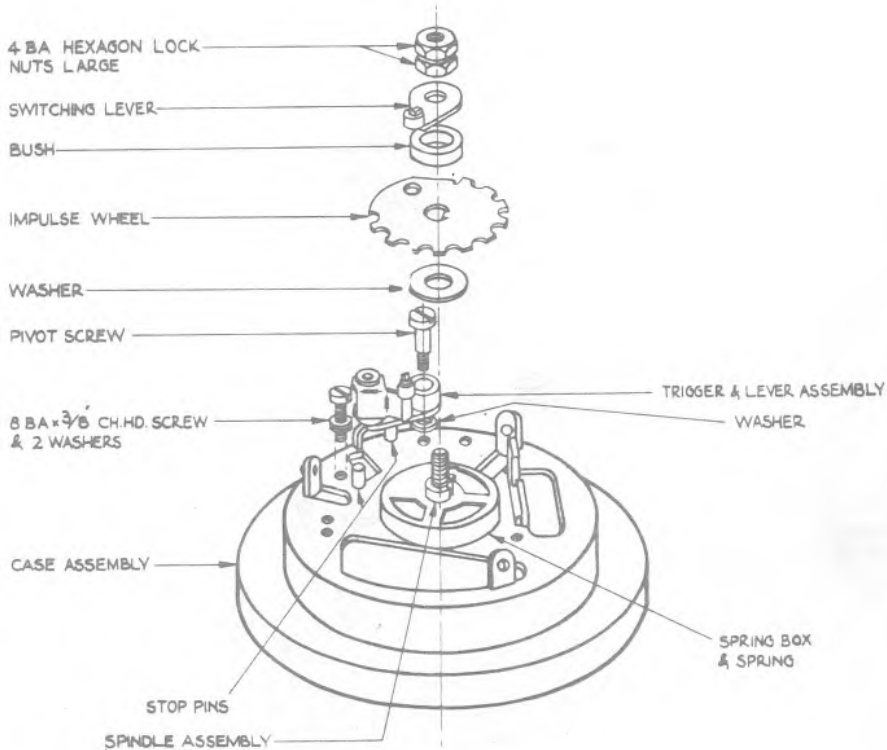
EXPLODED VIEW OF DIAL SWITCH 20
